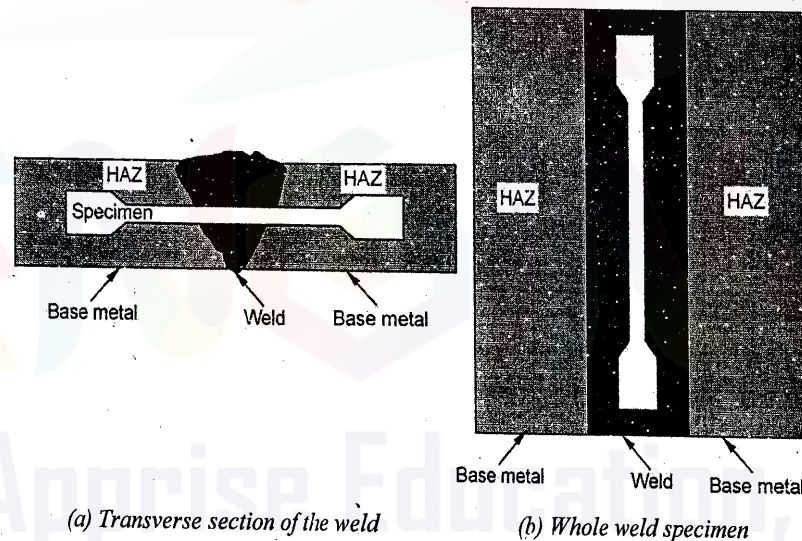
Schematic of weld specimens for tensile test
